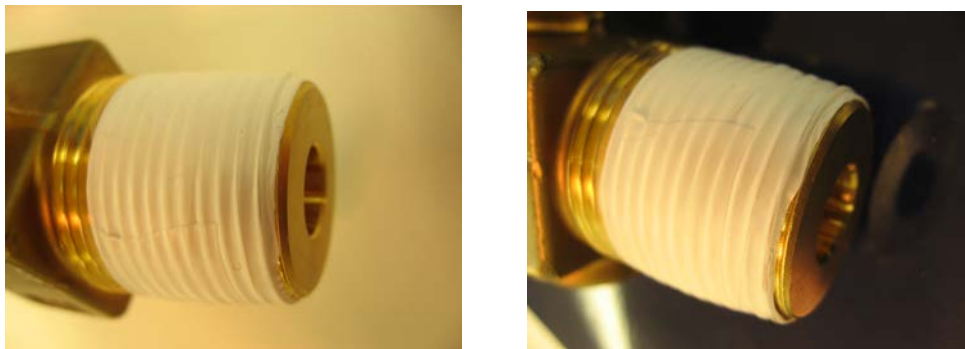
Typical examples of PTFE tape applied correctly to a valve thread
